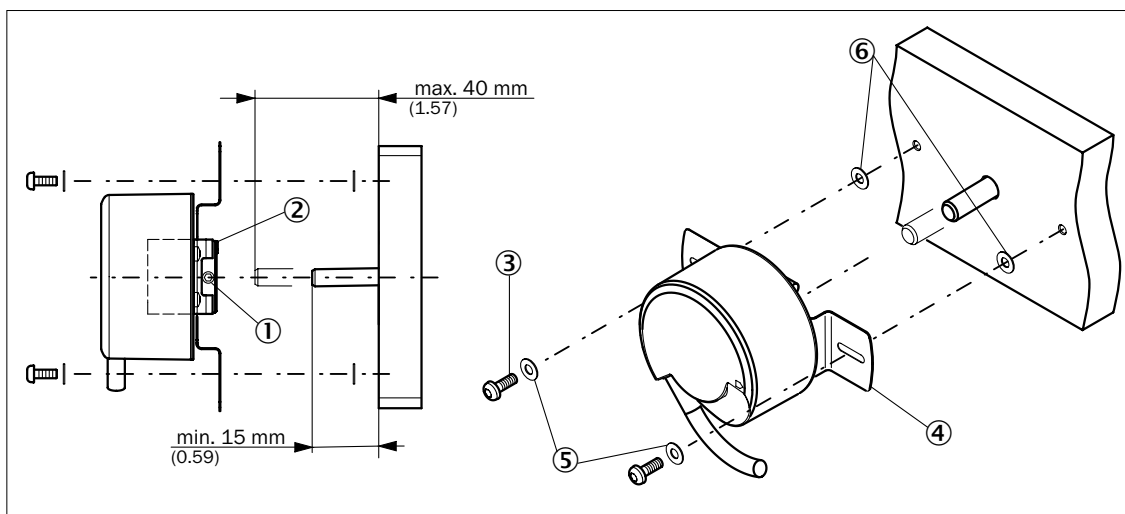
Mounting through hollow shaft with stator coupling O, B, D, E, G (clamping at the rear)
